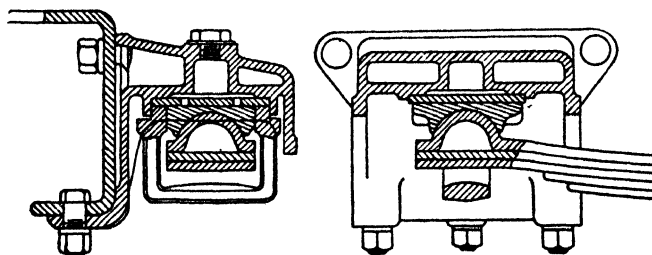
SPRING WITH SLIDING SHOES AND WEAR PLATES.
